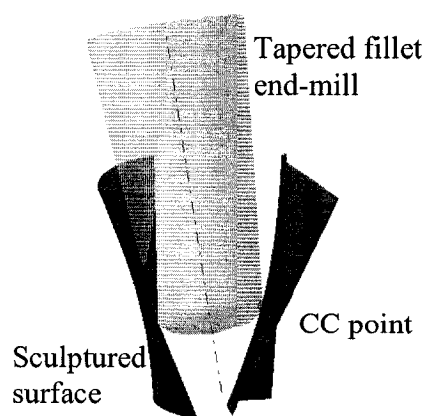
Interference: the shank of a bull-nose end-mill interferes with one design surface
